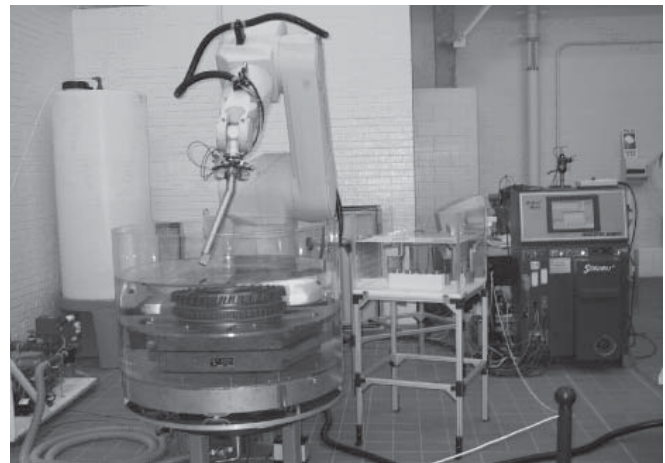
TESI Program Automated Ultrasonic Inspection System Inspecting a Compressor Disk Using a Phased Array Ultrasonic Probe.
